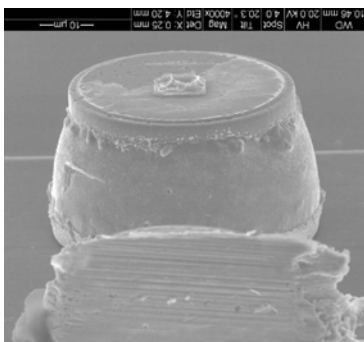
A broken SnAg bump from substrate wafer 8. The bump had loosened from the sensor chip and the fracture surface could be studied.
